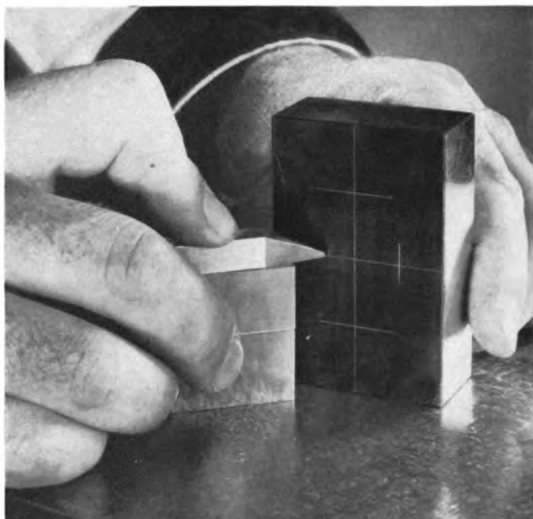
Use of a special, lapped scriber and gage blocks for layout.
